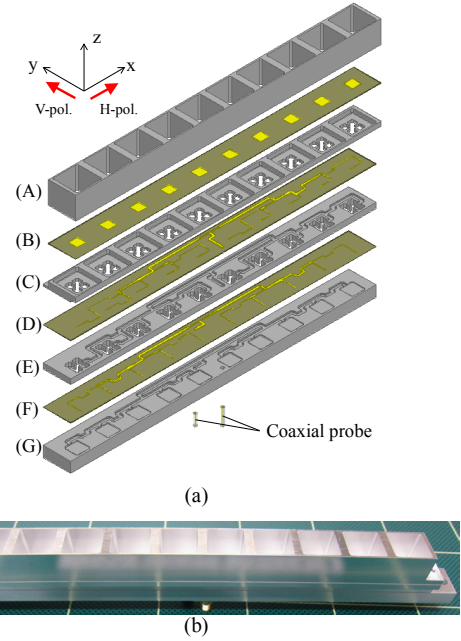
(a) Exploded view of the prototype subarray and (b) a photo of a fabricated subarray.
